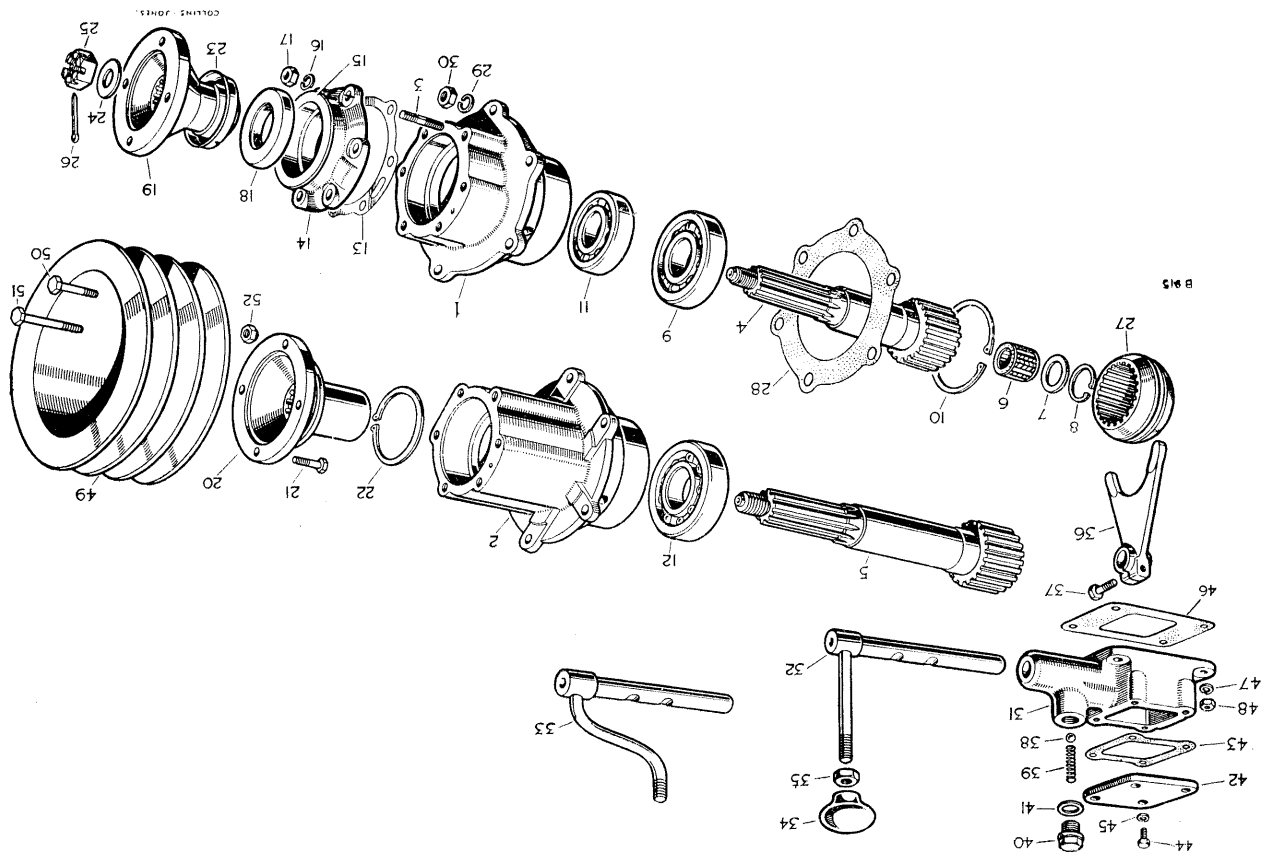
Layout of gearbox drive unit and centre pulley (early type illustrated)
